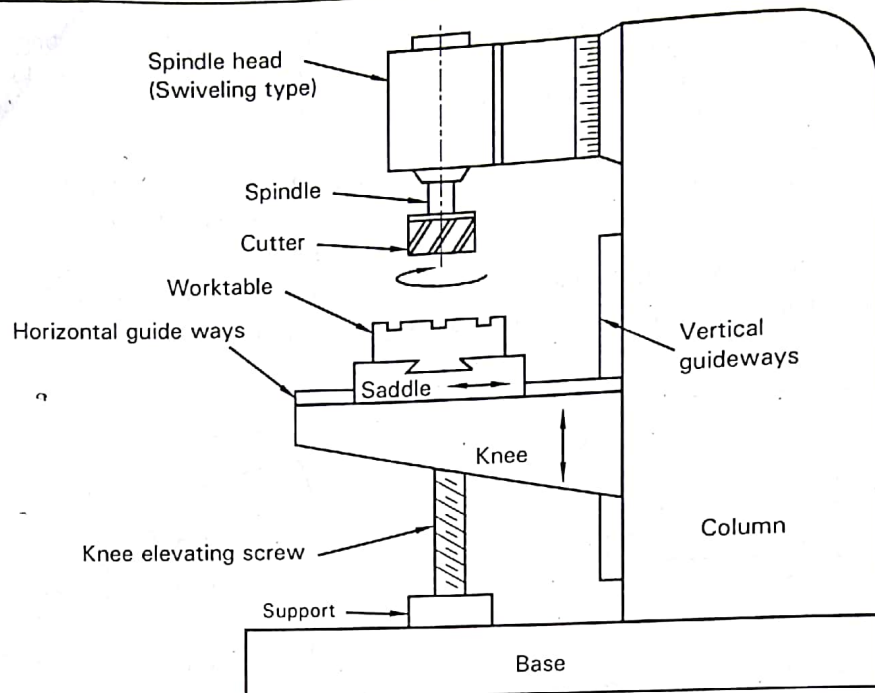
Vertical spindle column and knee type milling machine (swiveling type)
